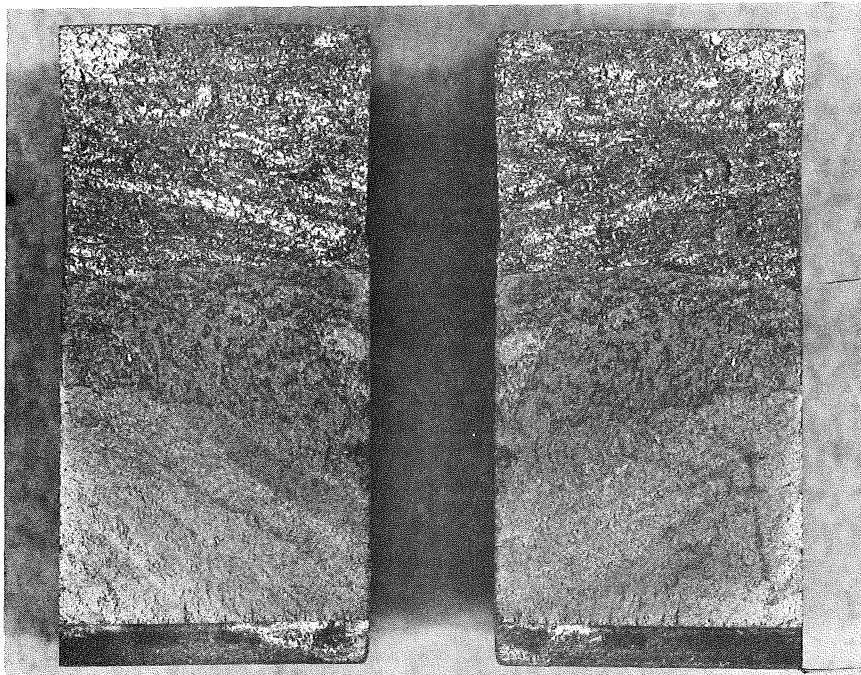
Topographic features of a fatigue crack through zone I weldment.
